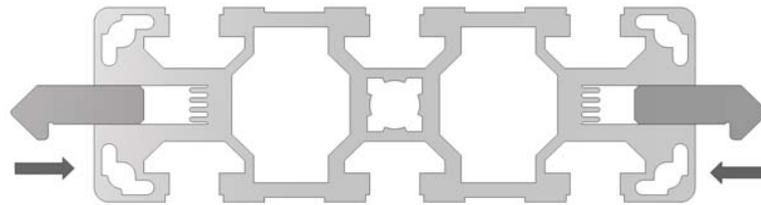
Steel v-rails inserted in extruded or machined pockets containing fingers in an aluminum structure.
